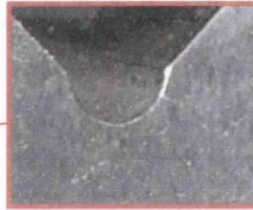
V bend test machine tooling cut out channel to eliminate coining
